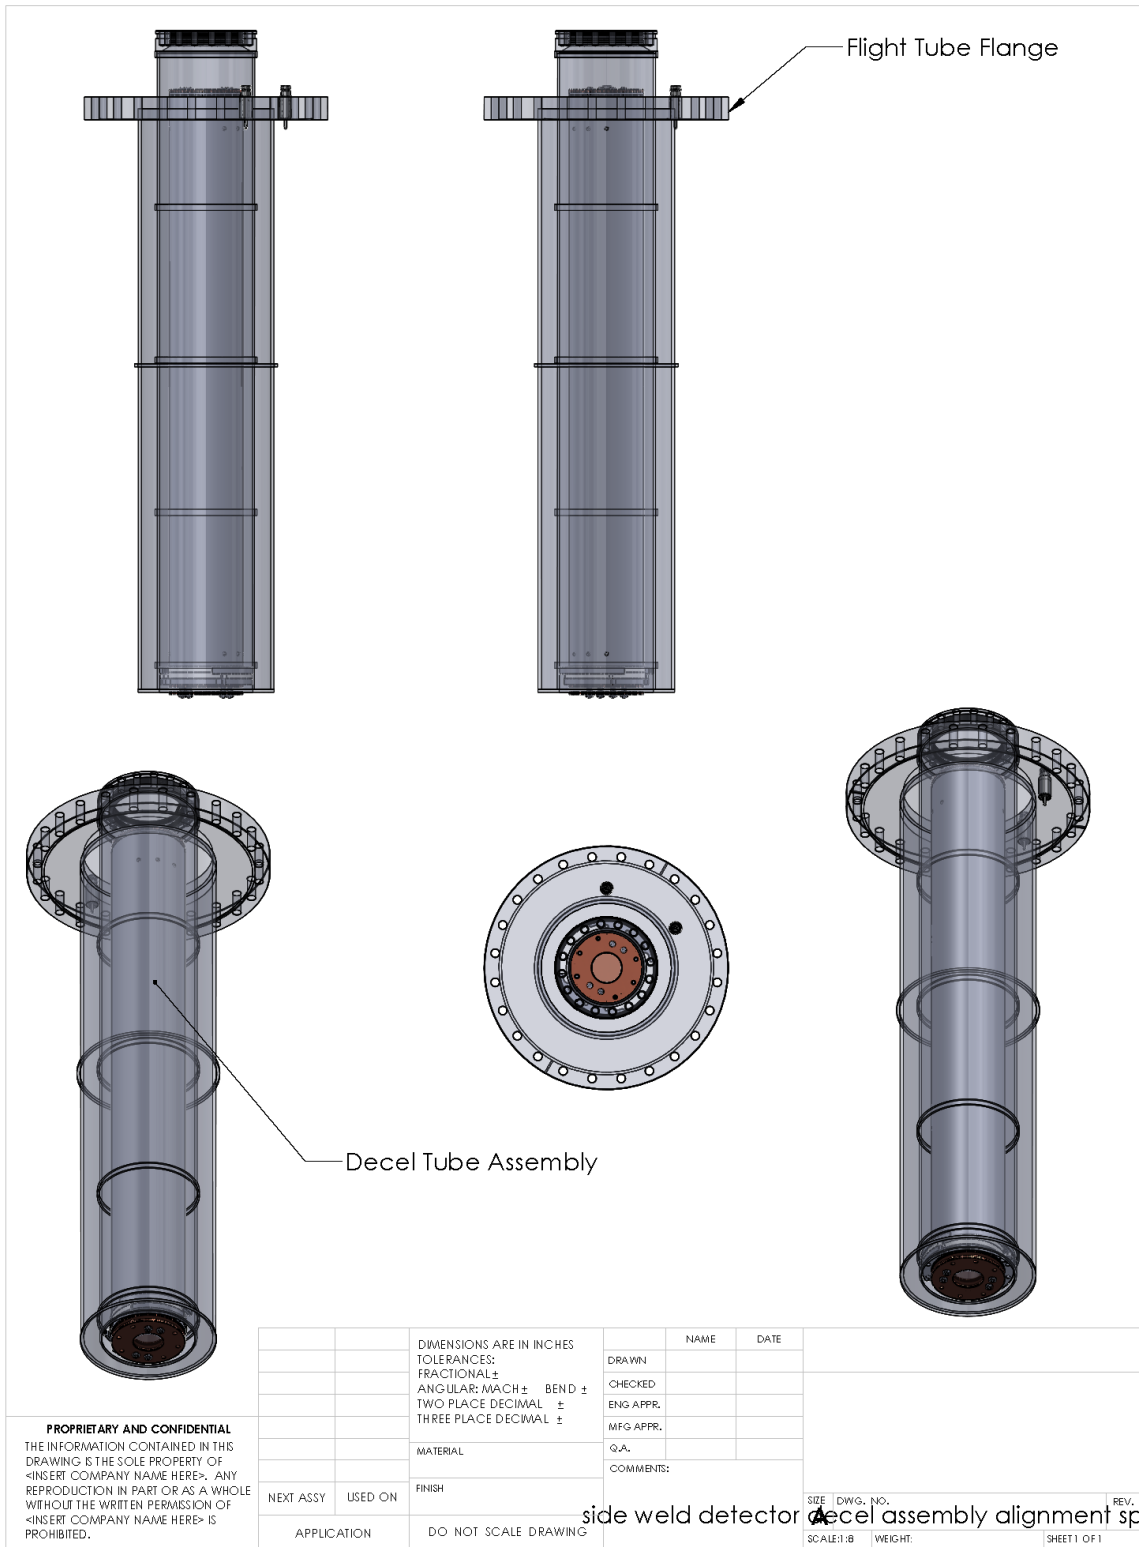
Decelerator assembly shown inside of the flight tube.
